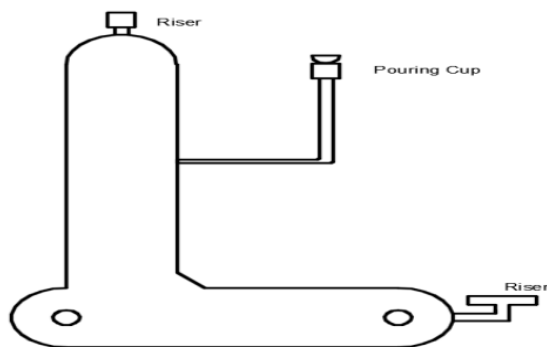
a: -Middle-side Runner & top-bottom Riser Pouring
